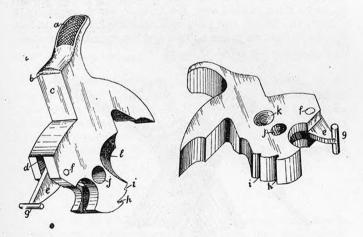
Hammer assembly The Stirrup e, consists of a flat part, through which is drilled the stirrup pin hole f, with the end opposite the hole terminating in a cylindrical projection g, perpendicular to the stirrup axis. This cylindrical projection is acted on by the mainspring to give the spring tension necessary for the functioning of the hammer.
